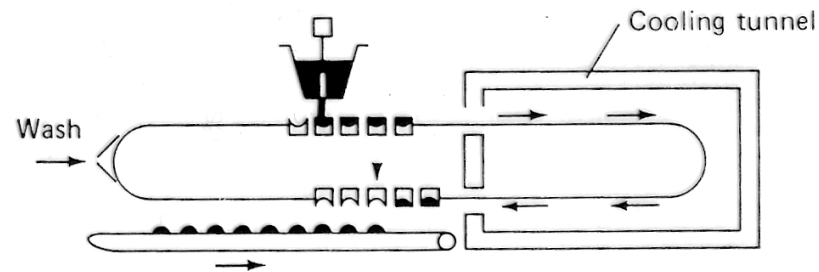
Confectionery moulding: an air demoulding depositor. (Courtesy of Baker Perkins Ltd.)
